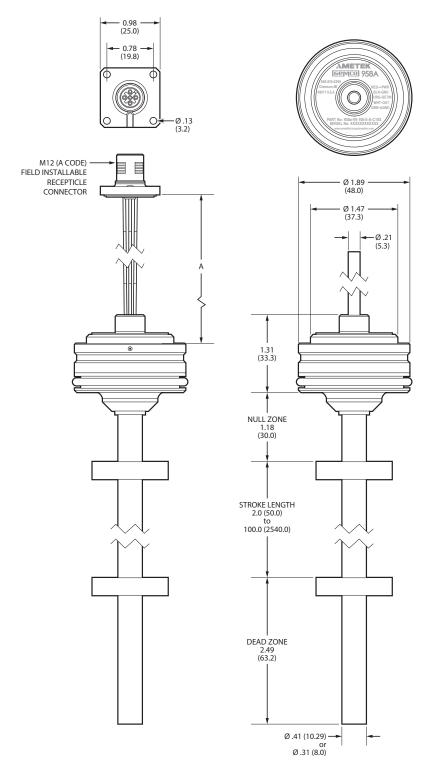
958A Dimension Drawing (PD-0126000)
